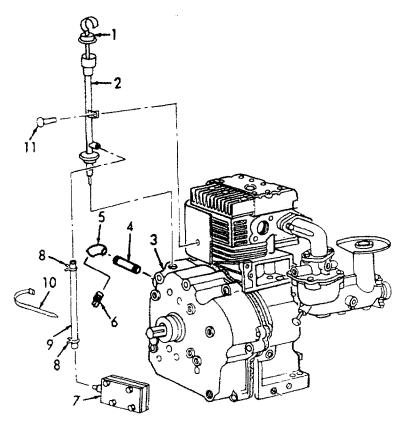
Oil Gage Rod, Tube, and Drain, Removal/Installation.
